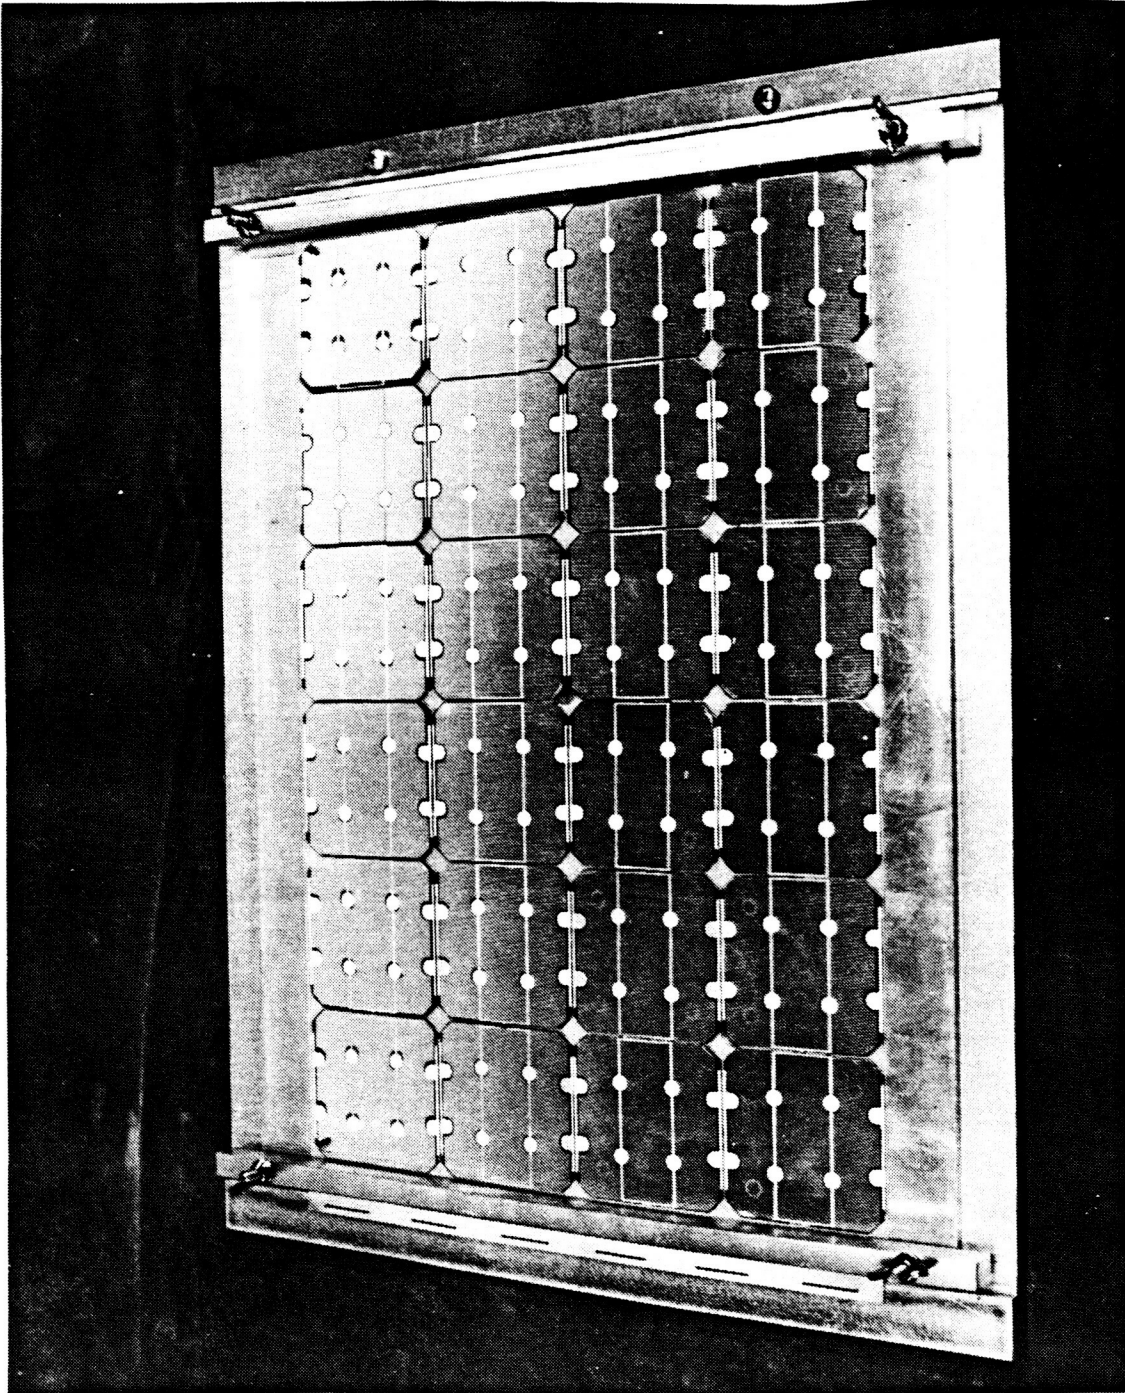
Superstrate Assembly Positioned in Bonding Tool
